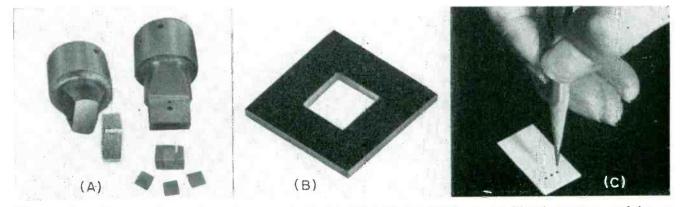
Tool for slicing quartz crystals showing quartz boule and waters (A) machined ferrite core (B) and ceramic-spacer holes cut to close tolerances (C)
